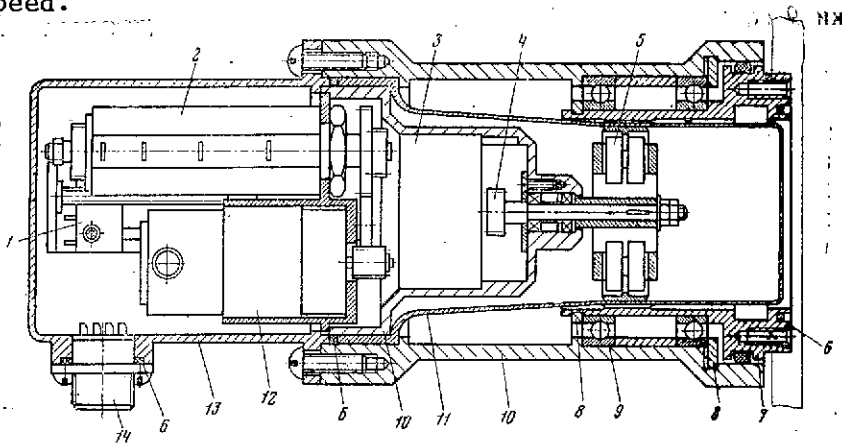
General view of the electromechanical module, 1 -- blocking mechanism; 2 -- potentiometer; 3 -- intermediate reducing gears; 4 -- pinion shaft; 5 -- generator; 6 -- packing; 7 -- rigid gear; 8 -- stop ring; 9 -- ball-bearing; 10 -- housing; 11 -- flexible shell; 12 -- microelectric motor; 13 -- cover; 14 -- parting seal.
